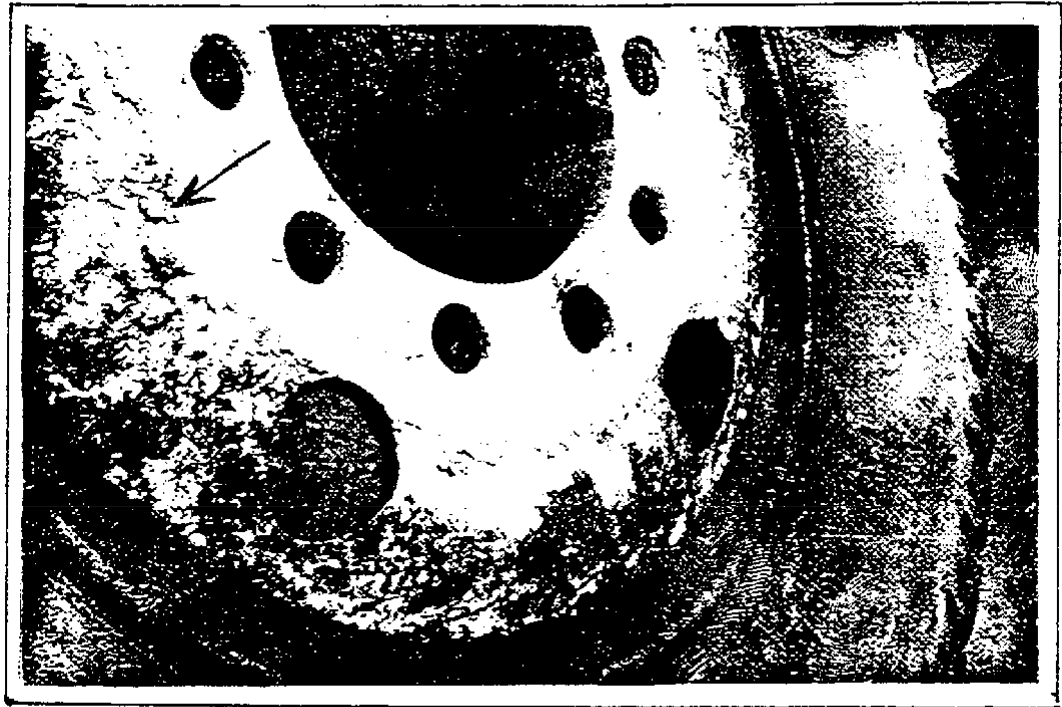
Aluminum Wheel Corrosion or Flaking
